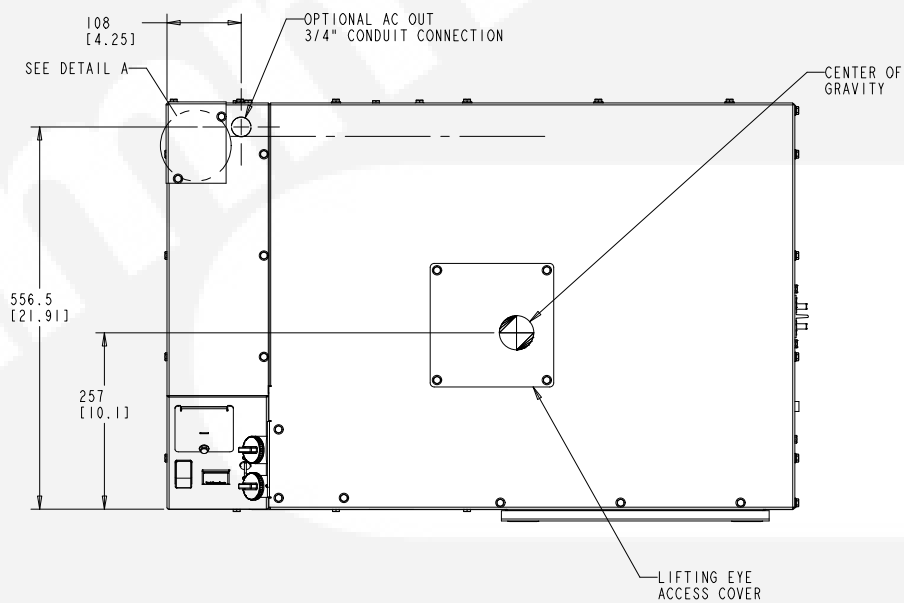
OUTLINE DRAWING—BOTTOM (NOT A PLAN VIEW)
